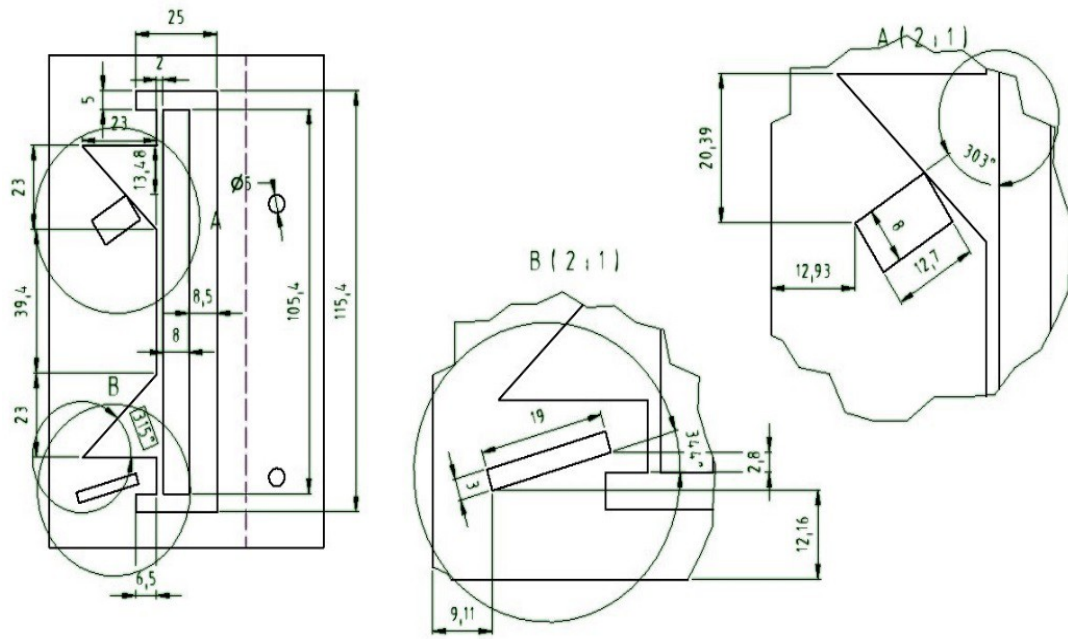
A sketch of the reference refractometer, dimensions in mm.
